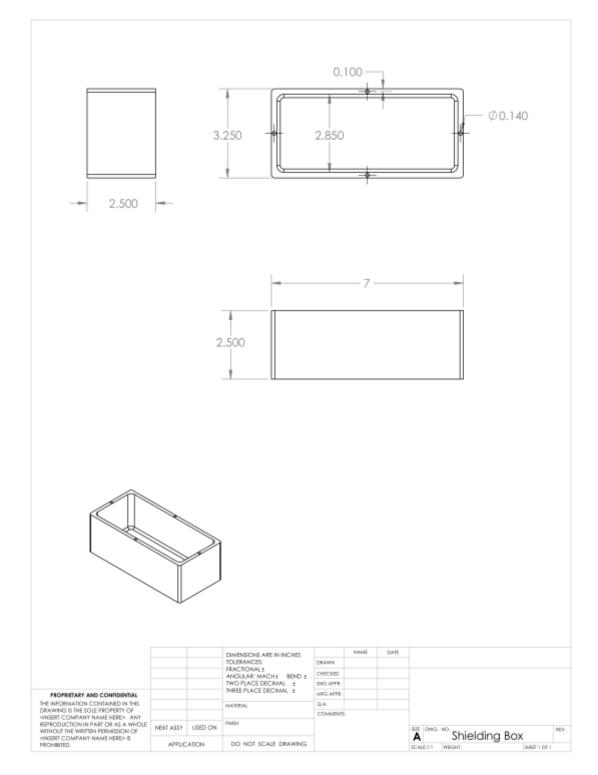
Mechanical drawing of electromagnetic shield for the detector board with dimensions in centimeters. See Figures A7 and A11 for positioning on detector board.
